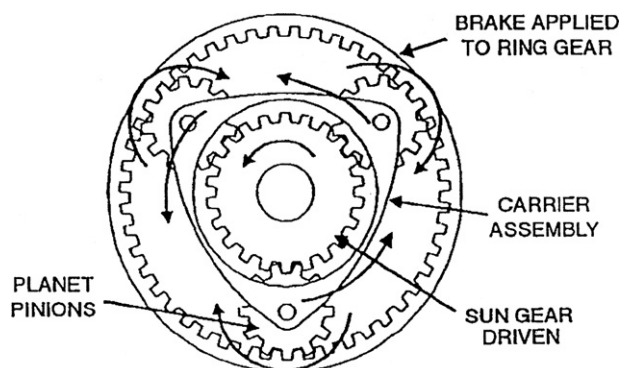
b) • Ring gear fixed carrier driving (speed increase)
